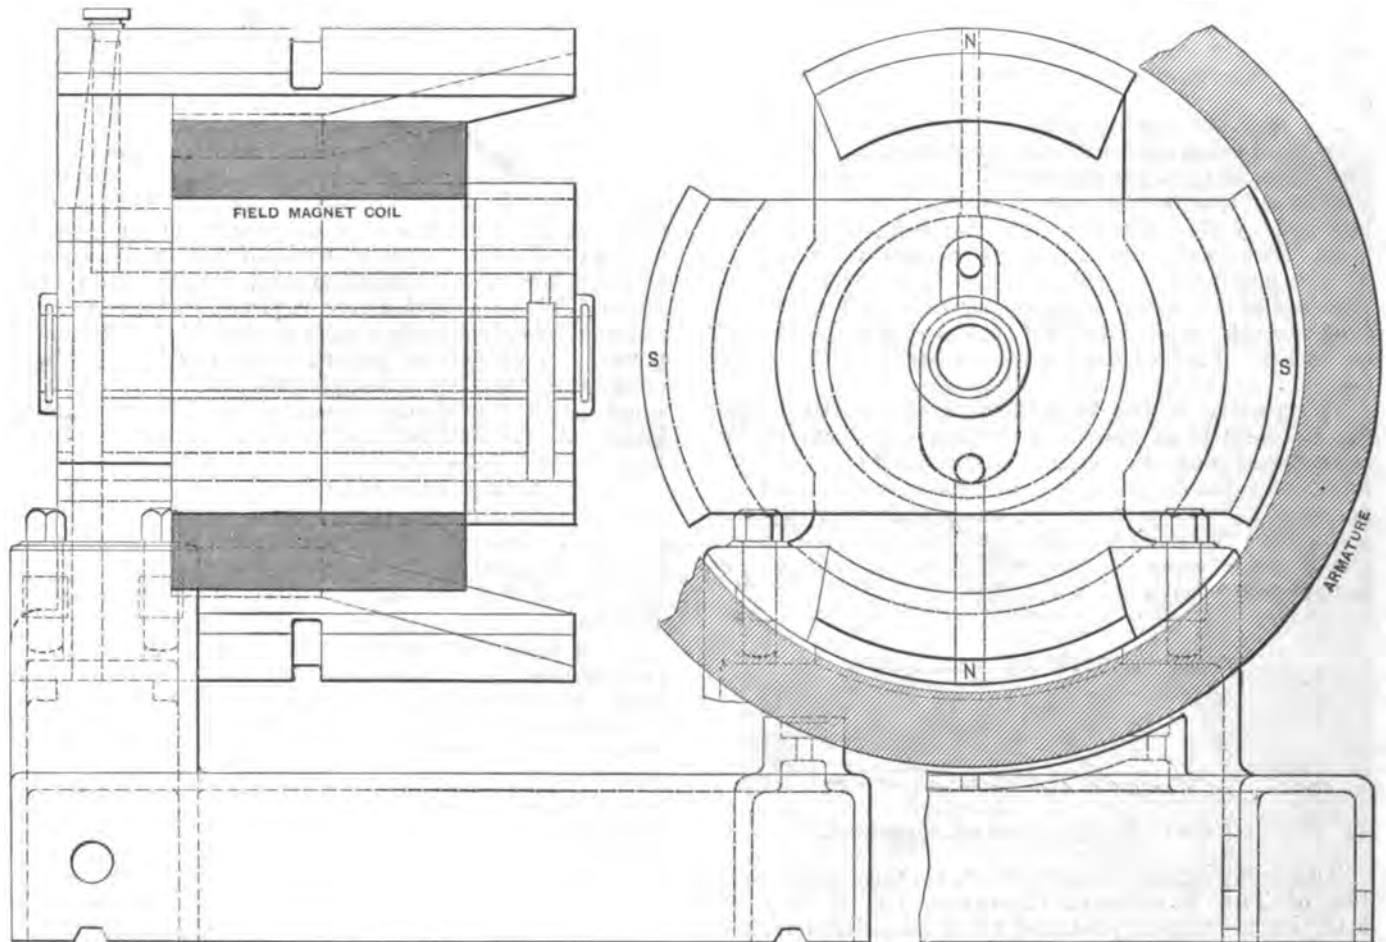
MAGNETIC FRAME OF WADDELL-ENTZ 4-POLE MACHINE.
